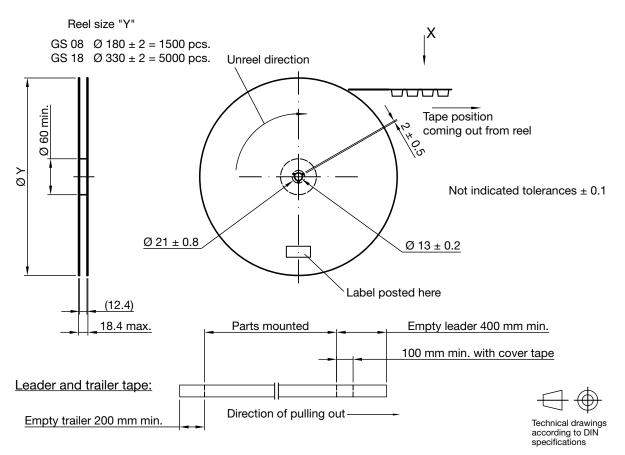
Issue: 1; 14.11.11 Not indicated tolerances ± 0.1
